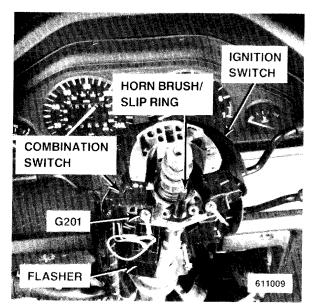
Top of Steering Column (Steering Wheel Removed)
